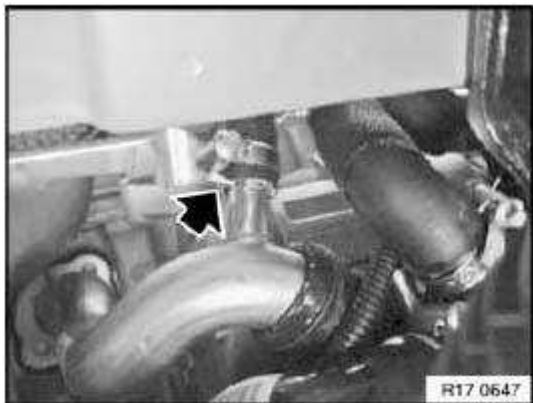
Locating Coolant Hose Between Coolant Pump, Coolant Radiator And Oil-Water Heat Exchanger
